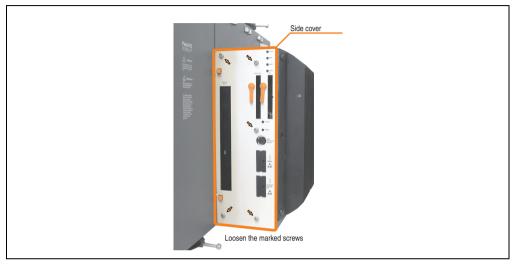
Example - Side cover removal on the system unit 5PC720.1505-02
